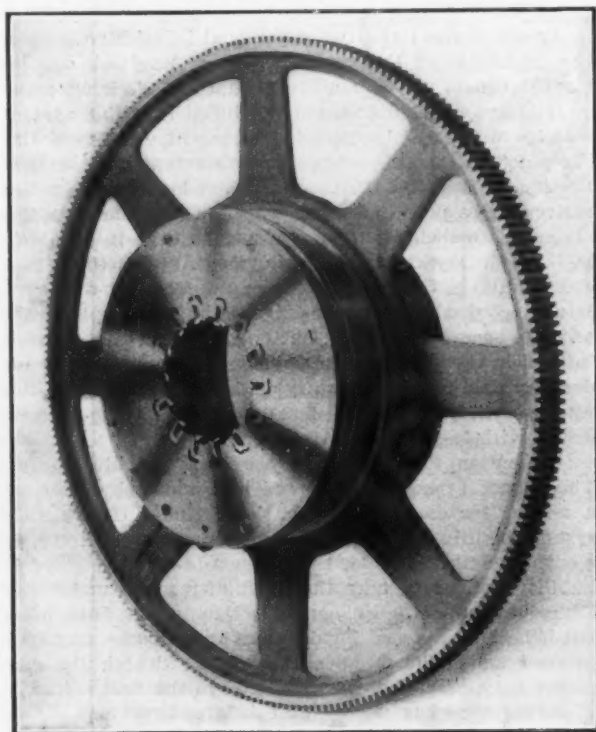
The Main Driving Gear with the Cutter Drum and Blade Complete.
